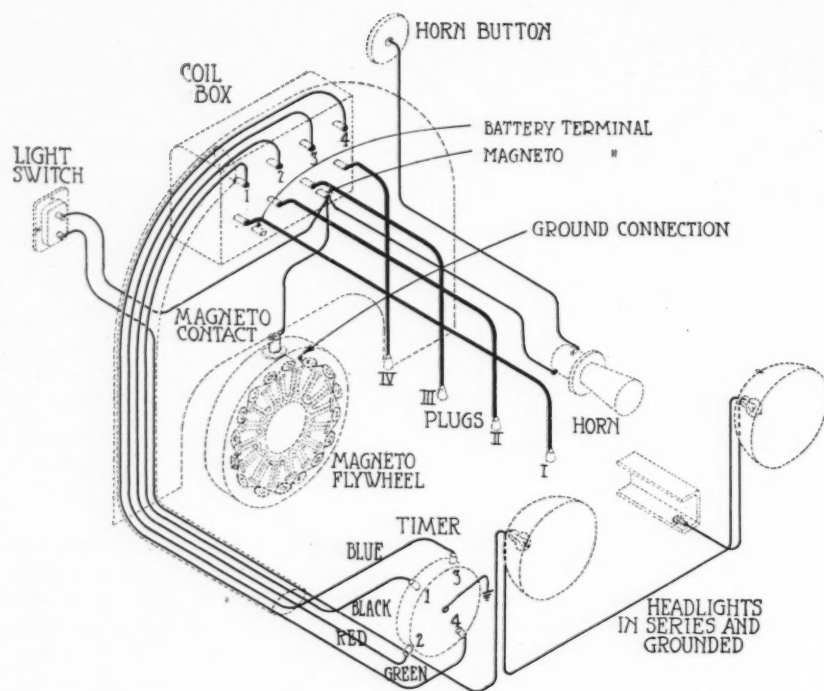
Perspective view of wiring and component parts of Ford standard electrical equipment
